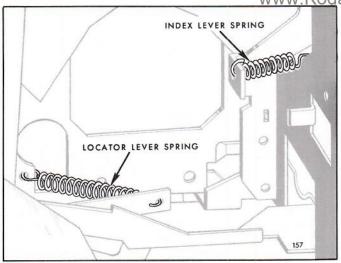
INDEX LEVER AND LOCATOR LEVER SPRINGS
